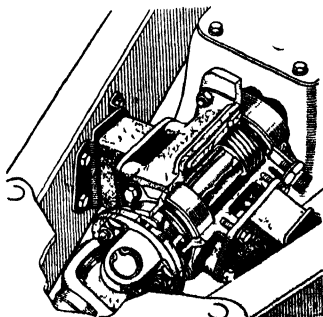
REAR DOUBLE MOUNTING OF AUSTIN ENGINE
